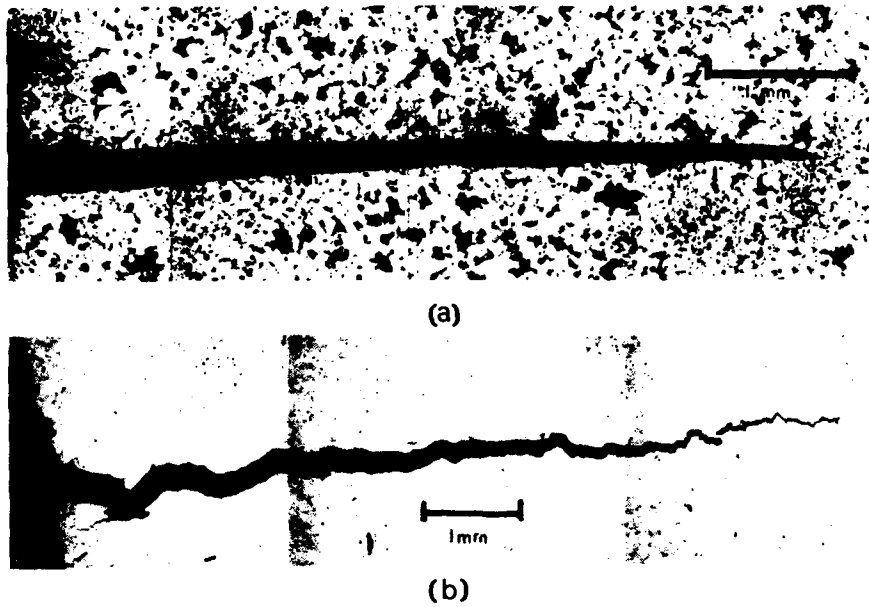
Examples of thermal fatigue cracking in rotors.
